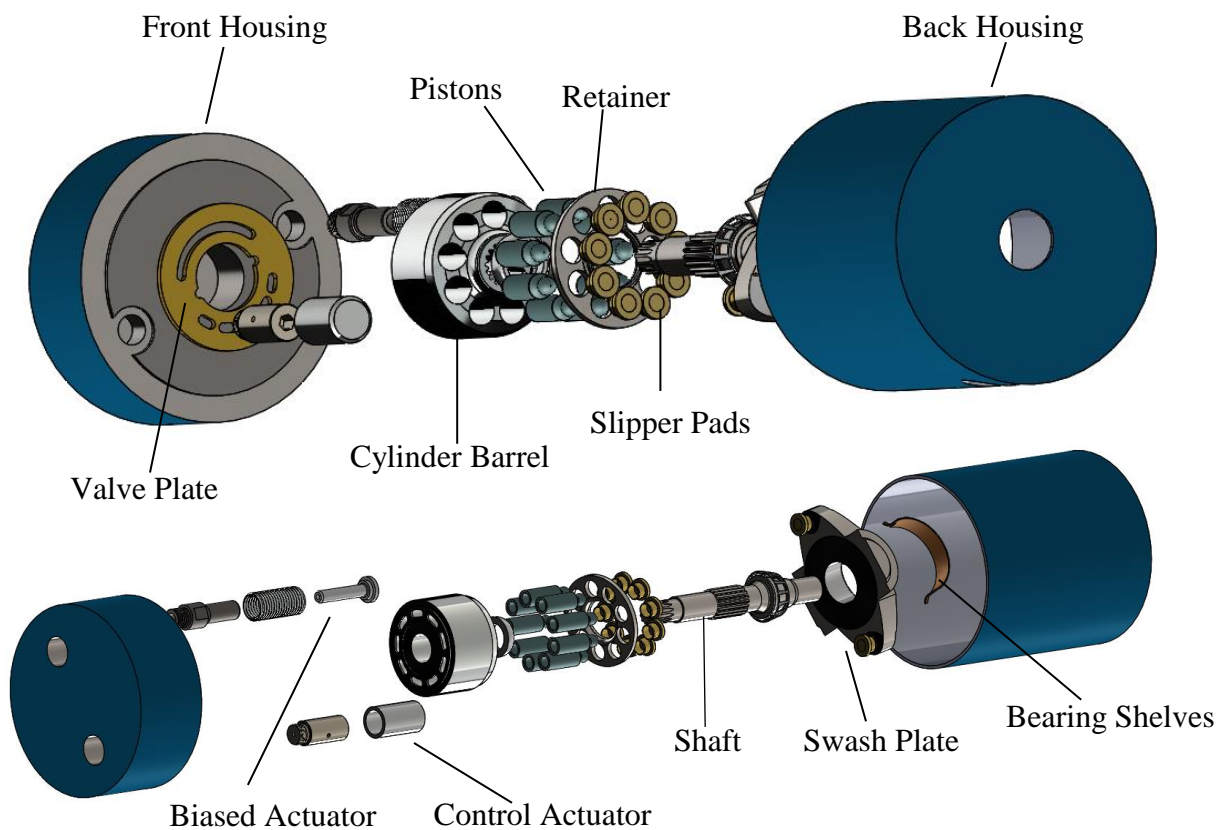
Exploded View of Variable Displacement Axial Piston Pump.
